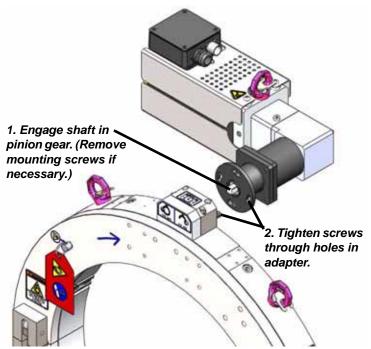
Mount the SDE to the pinion assembly on the LCSF.
